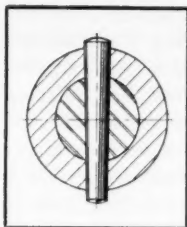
Drawing showing taper pin in position protruding equal amounts at each end.
